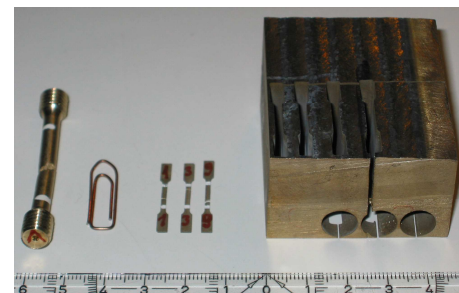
Micro flat tensile specimens and standard round tensile specimen extracted from laser surface cladded thick section material
